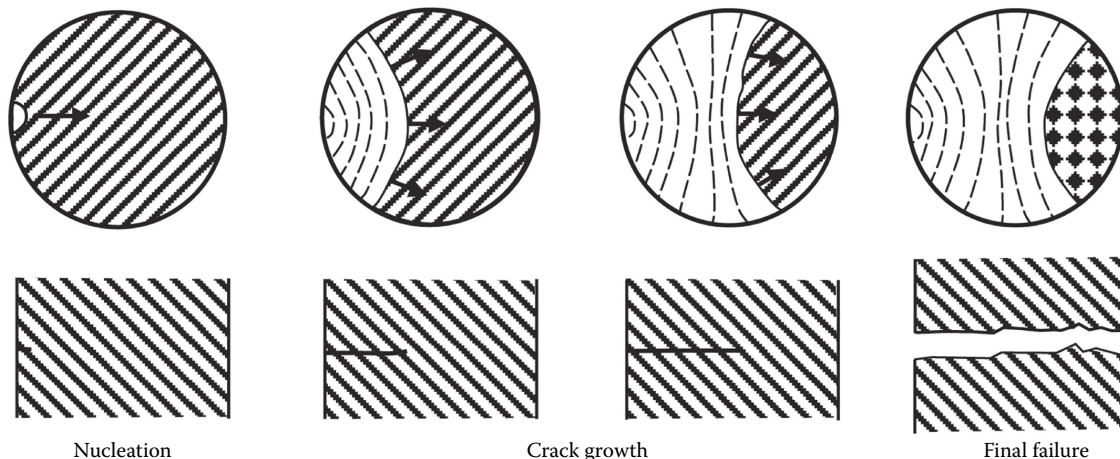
Three stages of the fatigue fracture mechanism^[50]
